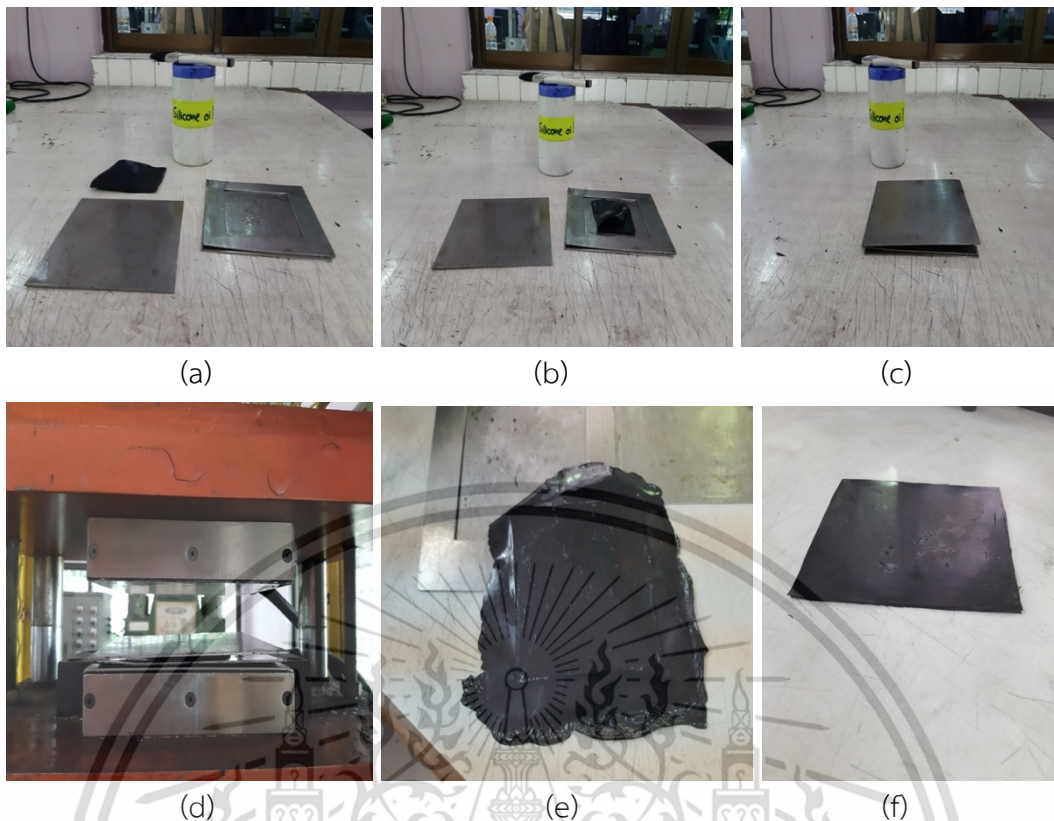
(a) mold is coated by a very thin silicon layer, (b) un-vulcanized rubber is placed in the mold, (c) specimen is ready for compress molding, (d) mold is placed in the machine, (e) vulcanized specimen right after being removed from mold and (f) extra parts of vulcanized specimen is removed
